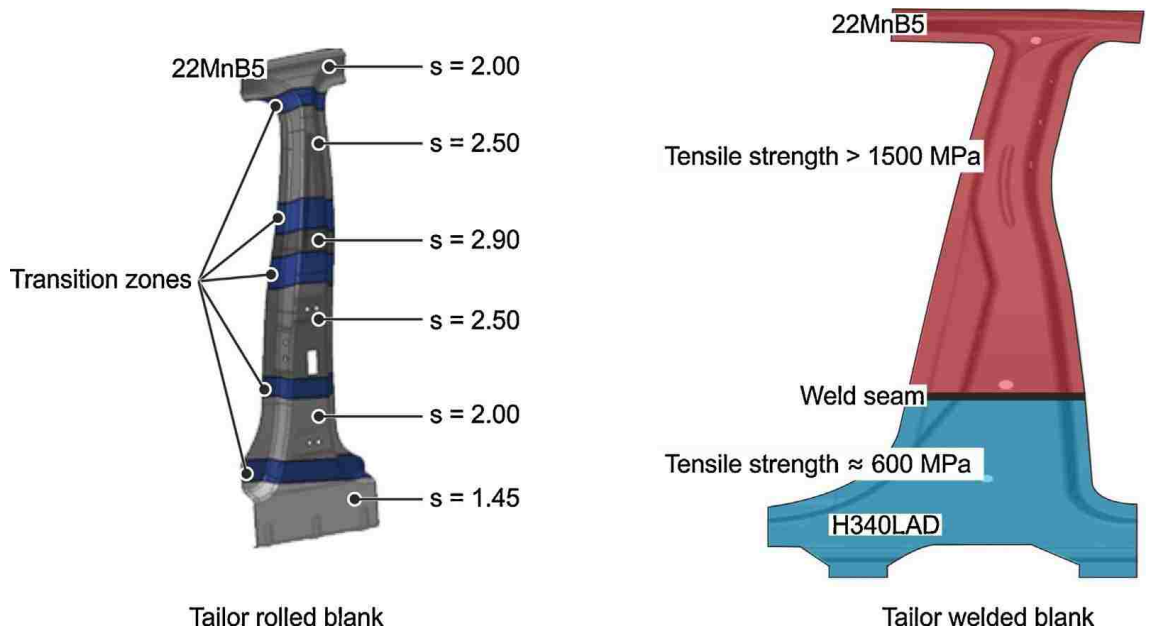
Example of tailored rolled blanks and tailored welded blanks (s is the initial thickness of the sheet in mm) [21]
